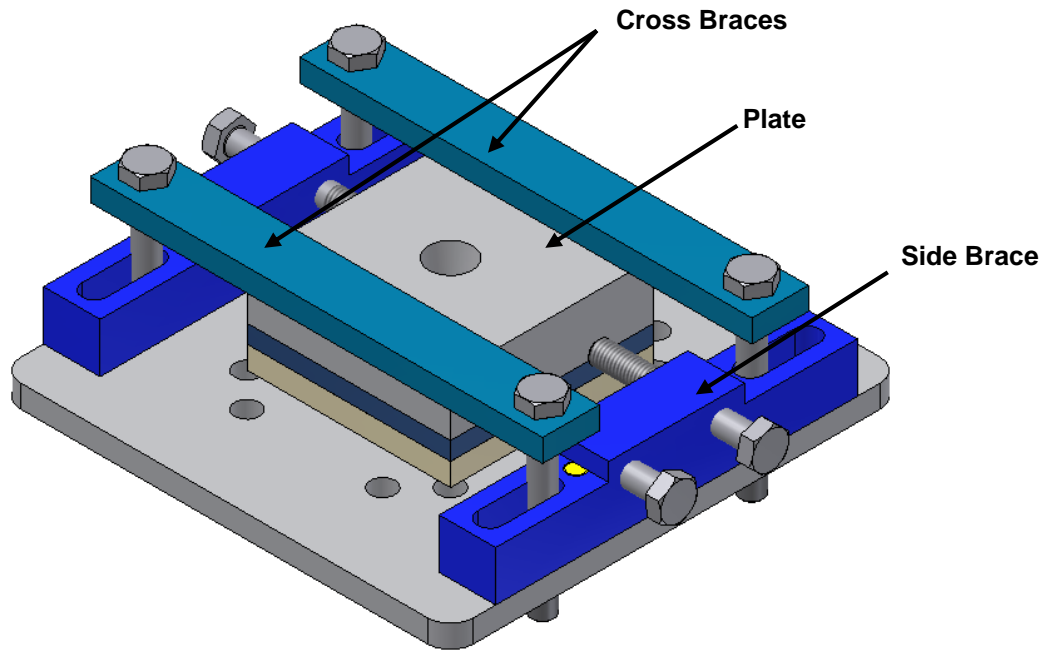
Welding Setup for FTSW Platform Welds
